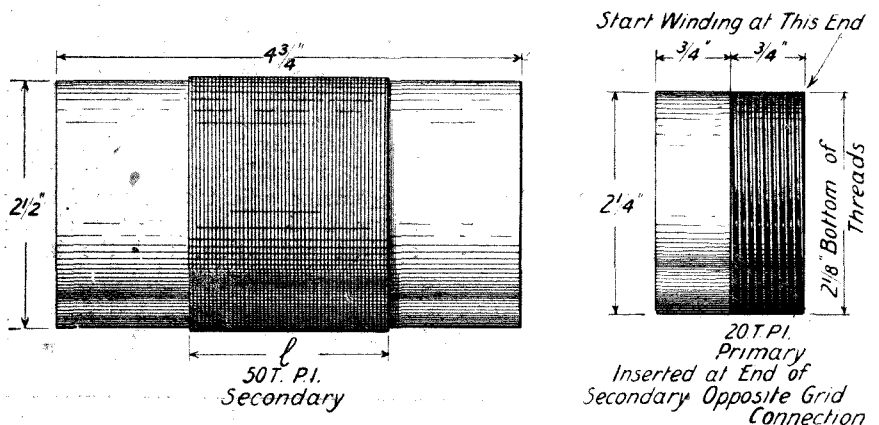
Dimensions and details of the H.F. transformer windings may be gathered from this sketch.
